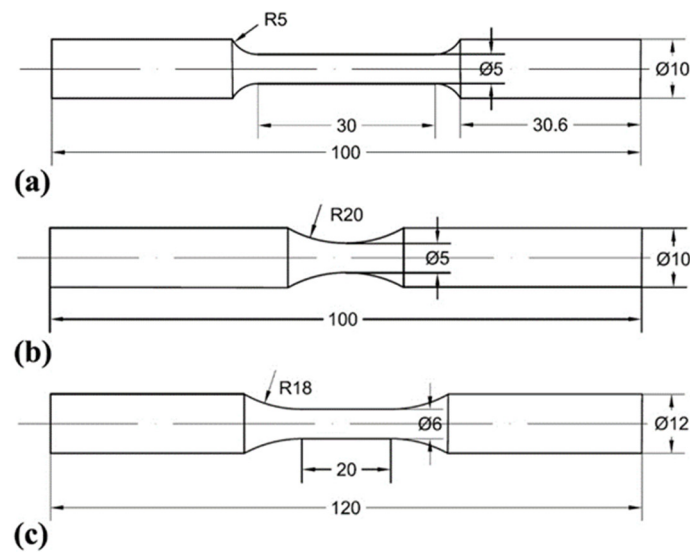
Shape and dimension of specimens (in mm). (a) Tensile specimen; (b) hourglass specimen, $K_t = 1.05$; (c) dogbone specimen.
